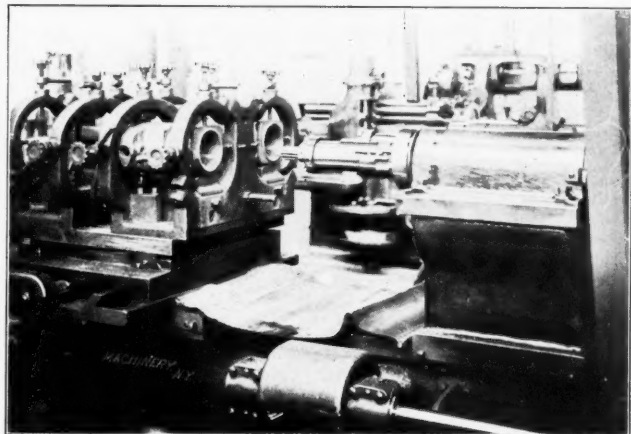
Lathe Fixture for Holding Four Cylinders while They are being Rough Bored
